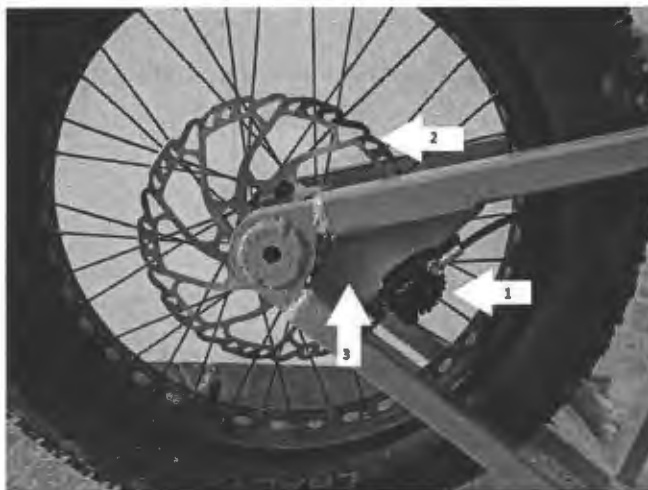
Connection of the caliper to the caliper mount and frame forks. 1) Caliper 2) Rotor 3) Caliper Mount
